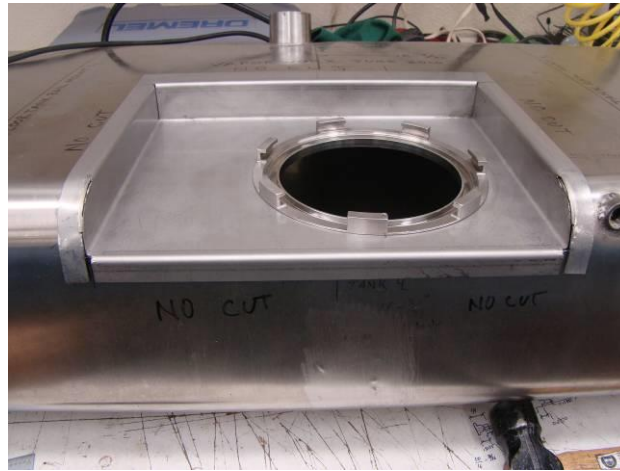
Minimal material removal and gaps will make for a better weld and lessen chance of leaks. Note that all of the cut edges will need to be welded.
